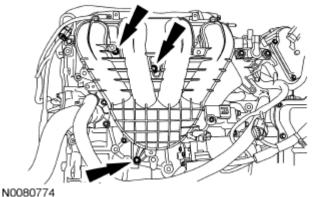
Locating Crankcase Vent Oil Separator Tube Courtesy of FORD MOTOR CO.
